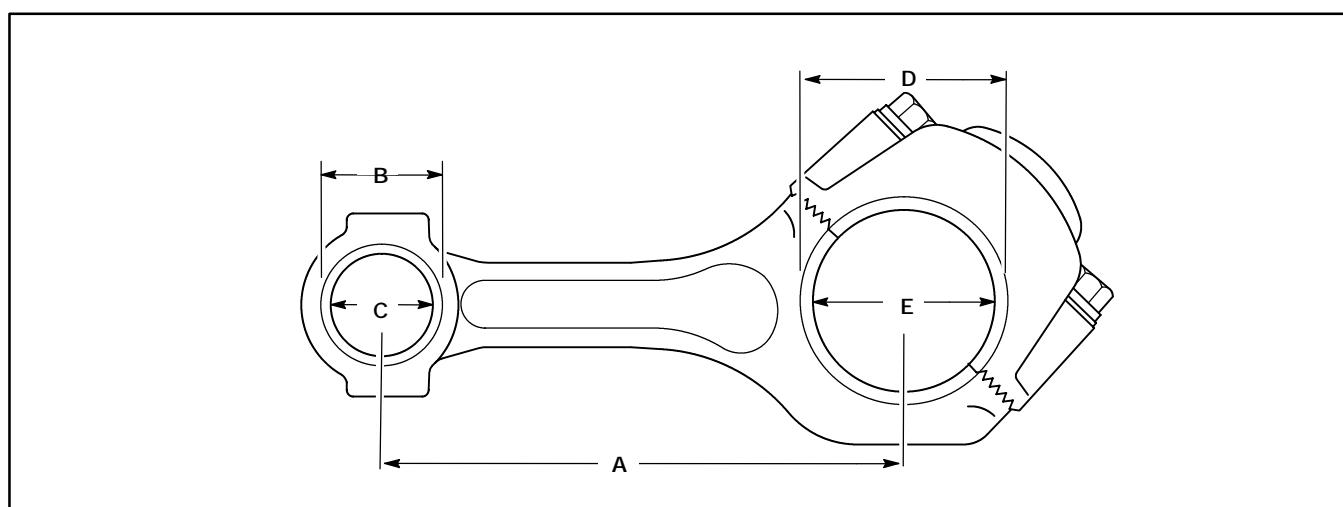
Connecting Rod, Bushing And Bearing
